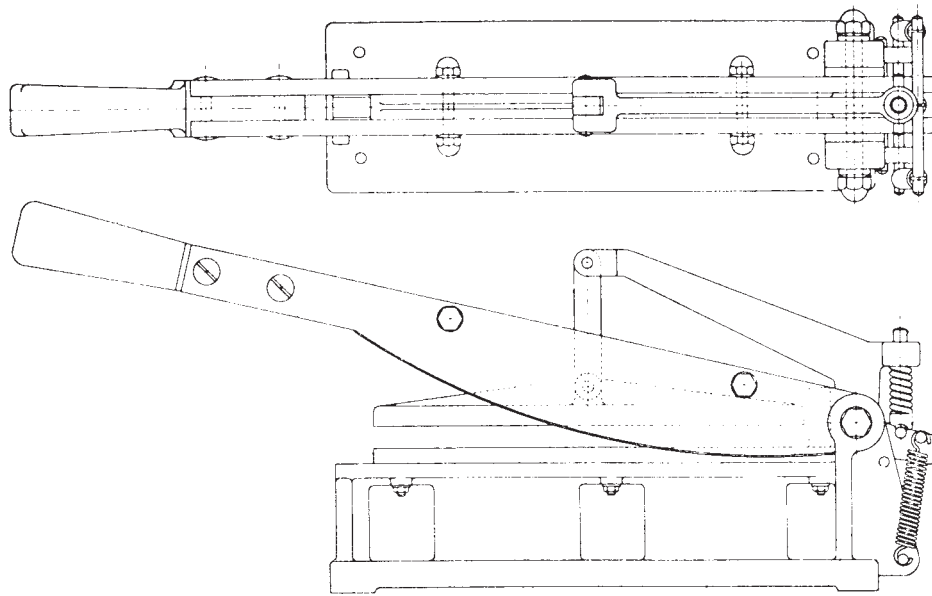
Double-Bladed Cutter for Making Type B Specimens
